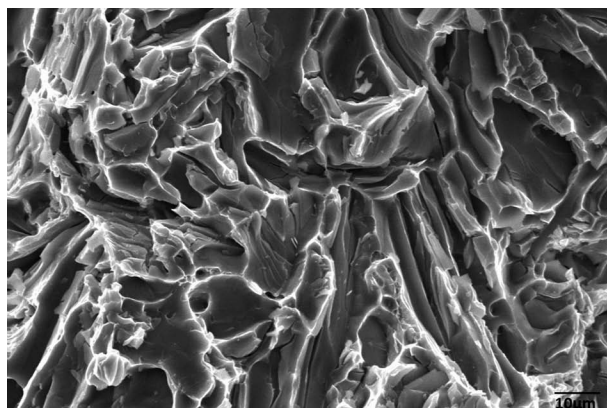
Higher magnified view shown in Fig. 248 indicating cracking of platelets throughout the surface
